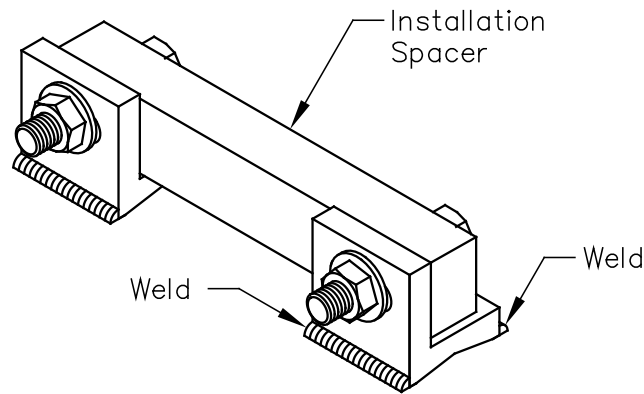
C – Welding Transducer Mounting Bracket / Installation Spacer
